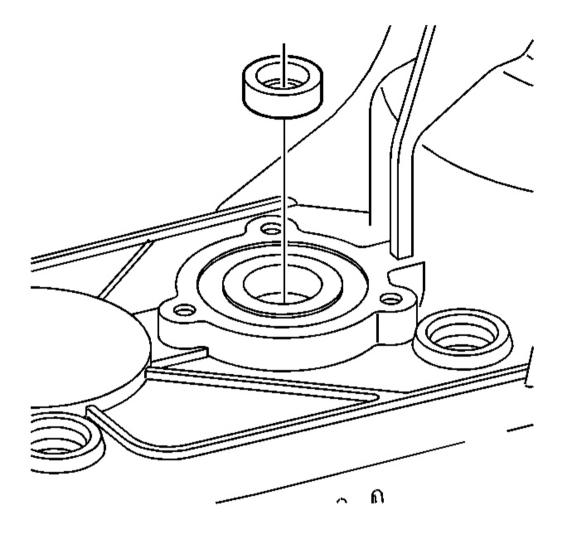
View Of Shift Detent Lever Shaft Seal Courtesy of GENERAL MOTORS CORP.
